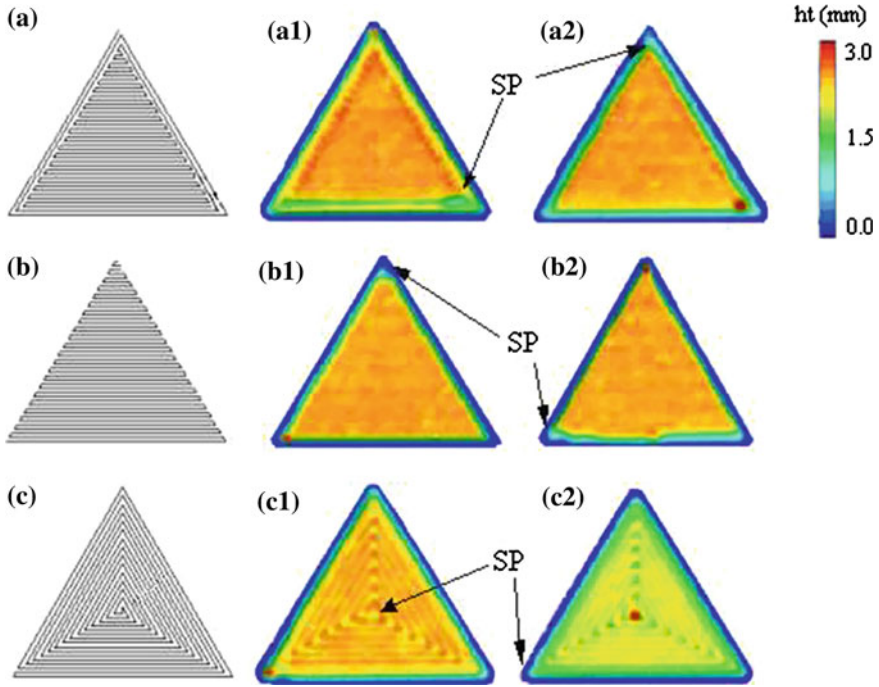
Actual AWJ-milled surfaces for each starting point (SP). a Tool path #3, b tool path #4, and c tool path #5 [34]
